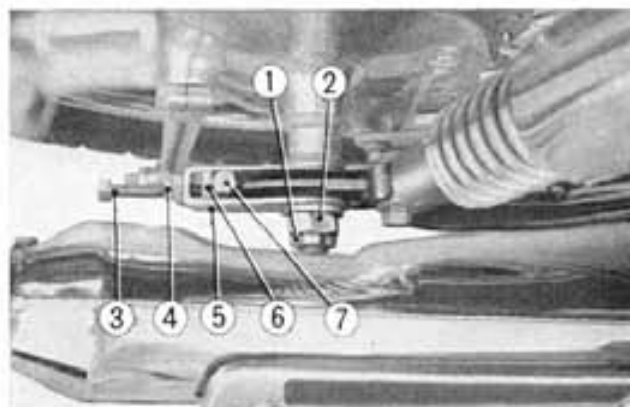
① Cotter pin ⑤ Chain adjuster
